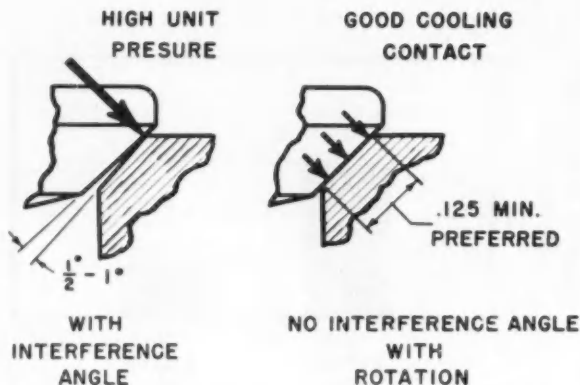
An interference angle between the valve face and seat helps crush deposits and prevent subsequent guttering
